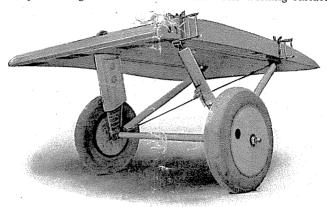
Vickers Oleo-Pneumatic Chassis.
